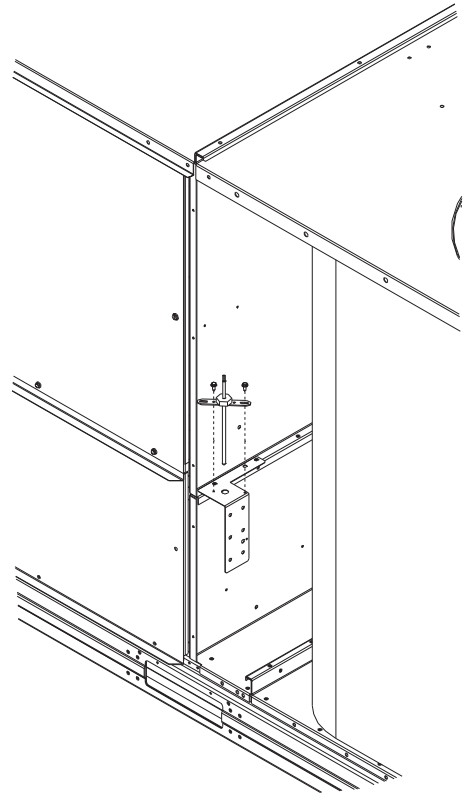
OAT Installation for Chassis 6 and 7 Units
